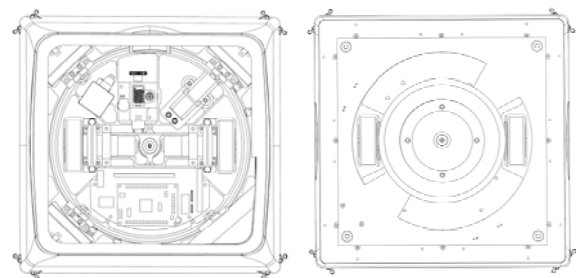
Left drawing is top view of the prototype whose upper cover is opened, right one is bottom view.
